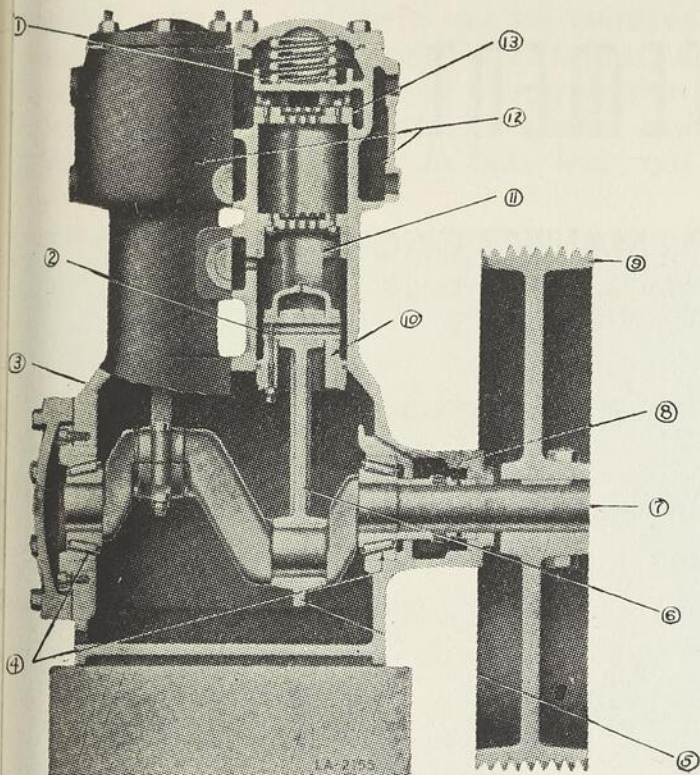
Outstanding features of the Worthington-Carbondale Roller Bearing Compressor.
